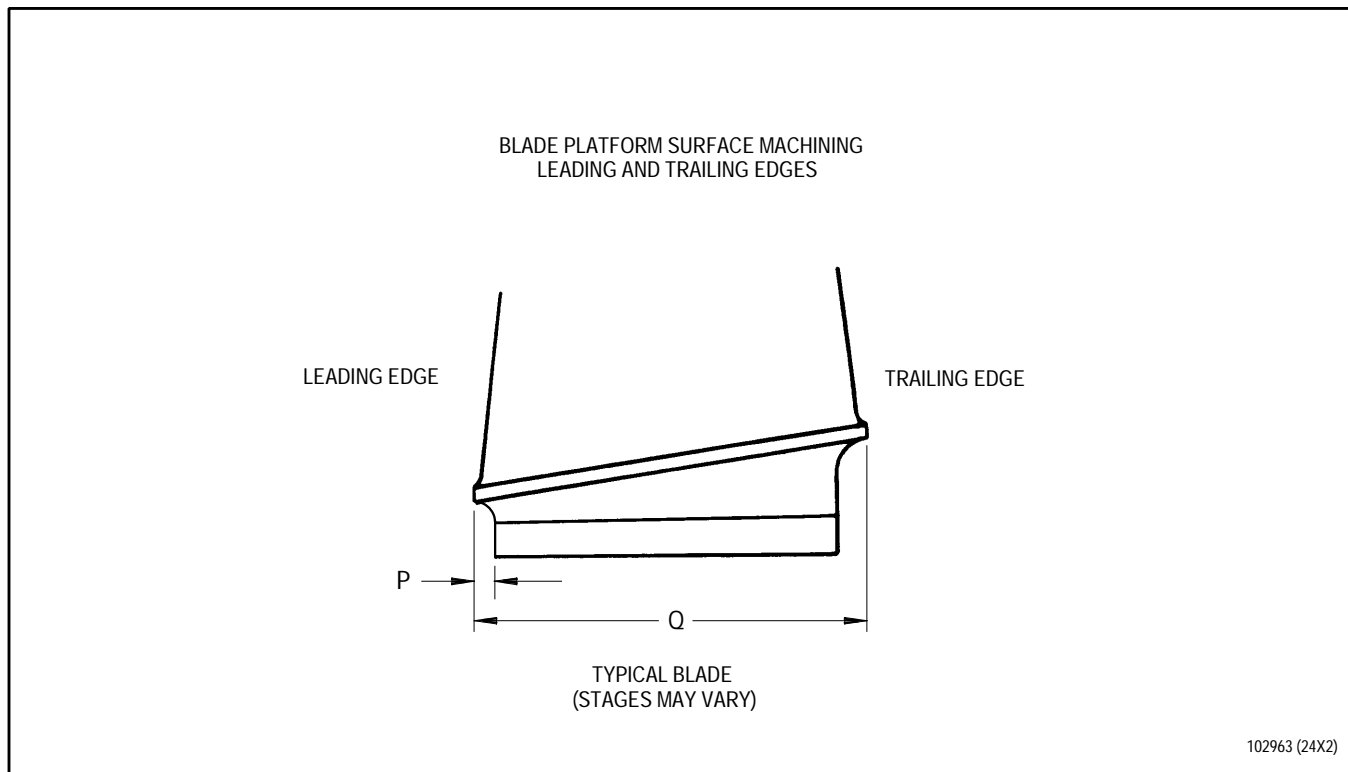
Compressor Rotor Blade Platform Corners - Blend Repair
